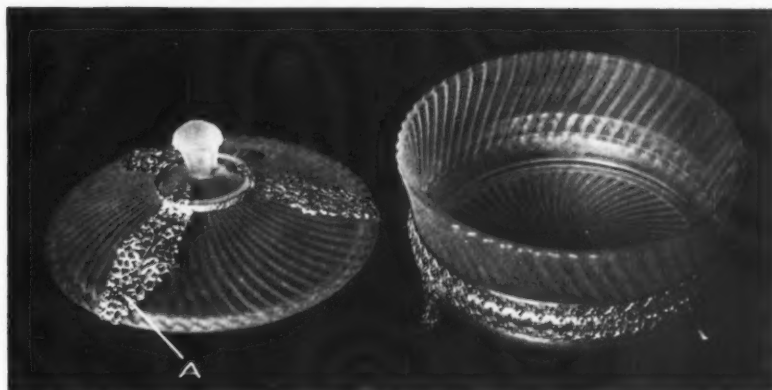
Candy Dish with Gold-plated Ornamental Parts Produced in Press Dies
